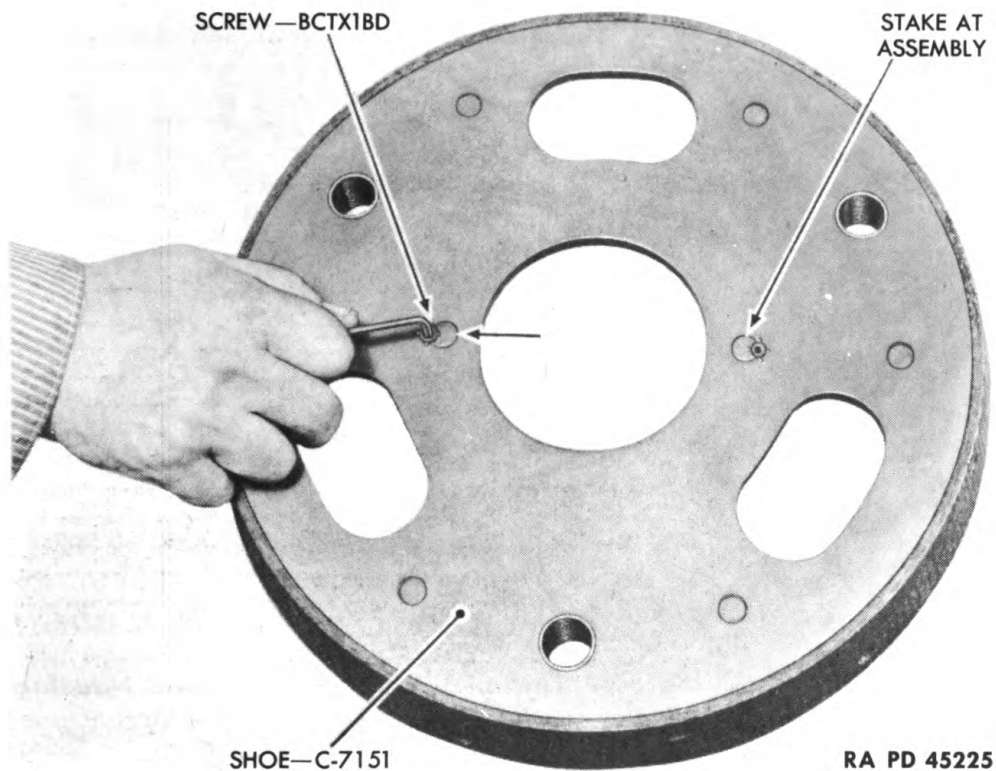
Removing Set Screw from Elevating Clutch Shoe and Stud
